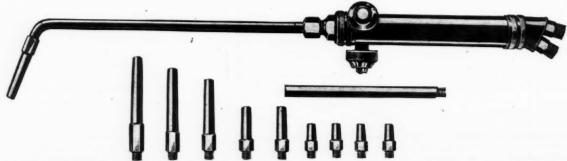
Welding torch with interchangeable tips. The mixing chamber is just in front of the torch handle
